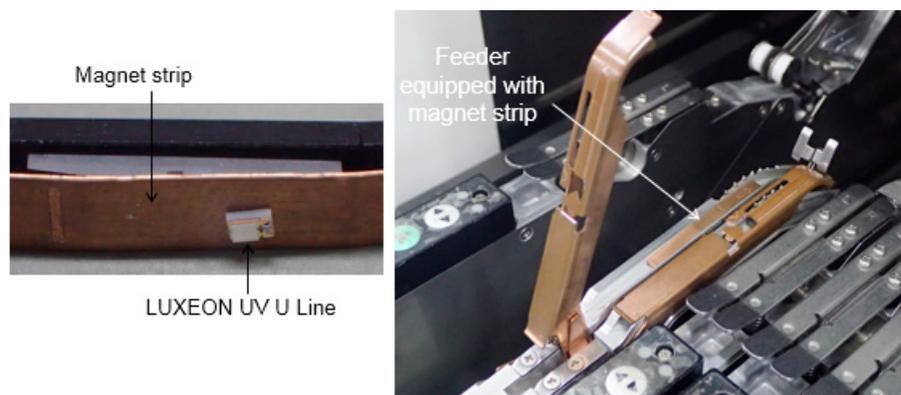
LUXEON UV U Line is held by the magnet strip (left). Feeder (e.g. Panasonic CM402) equipped with magnet strip (right).
